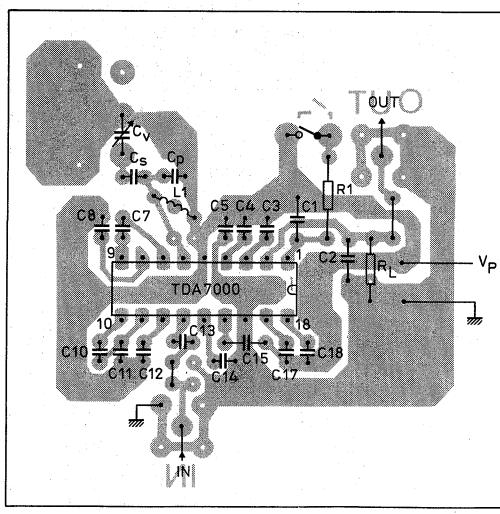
Component side of printed-circuit board showing component layout used for the circuit of Fig. 4.
